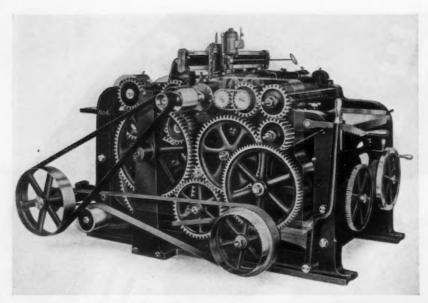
Buss double surfacer as formerly equipped with gears.
